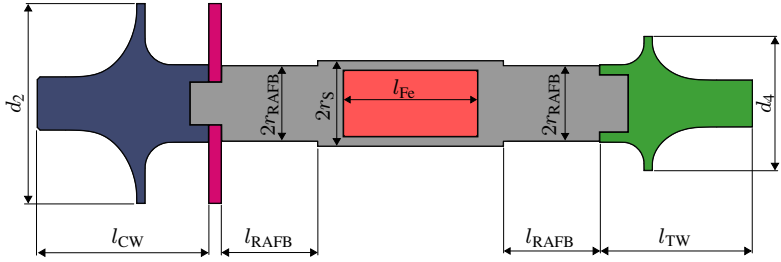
Schematic of the rotor configuration, showing the compressor wheel (blue), turbine wheel (green), and cylindrical magnet (red) contained in a sleeve. The shaft (gray) includes the sleeve and radial bearing seats, while the thrust bearing disc is colored magenta.
